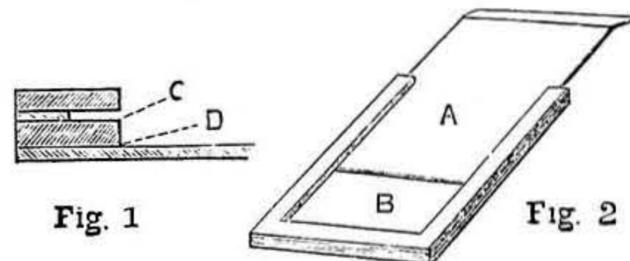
Section of Home-made Dark Slide for Camera—C, Groove; D, Recess. Fig. 2.—Slide Complete—A, Shutter; B, Recess for Plate.
